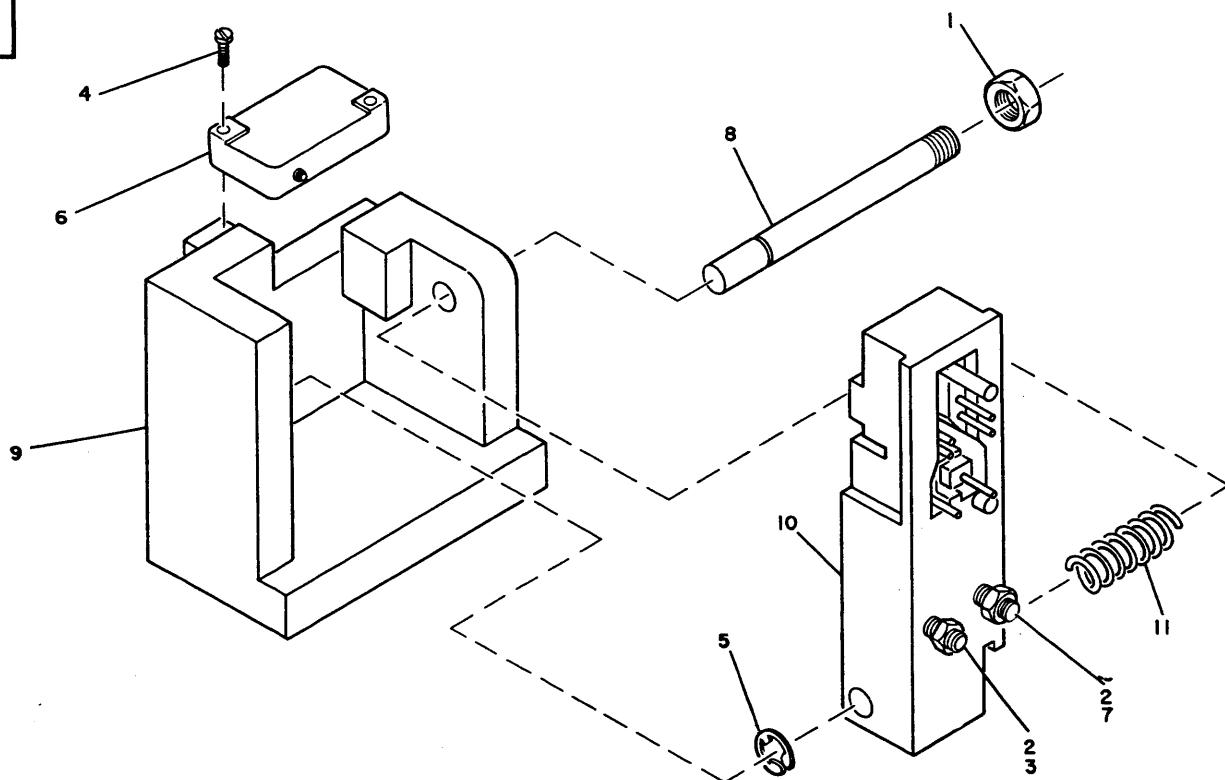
INDEX TRANSDUCER AND SUPPORT ASSEMBLY. SEE LIST 12.
